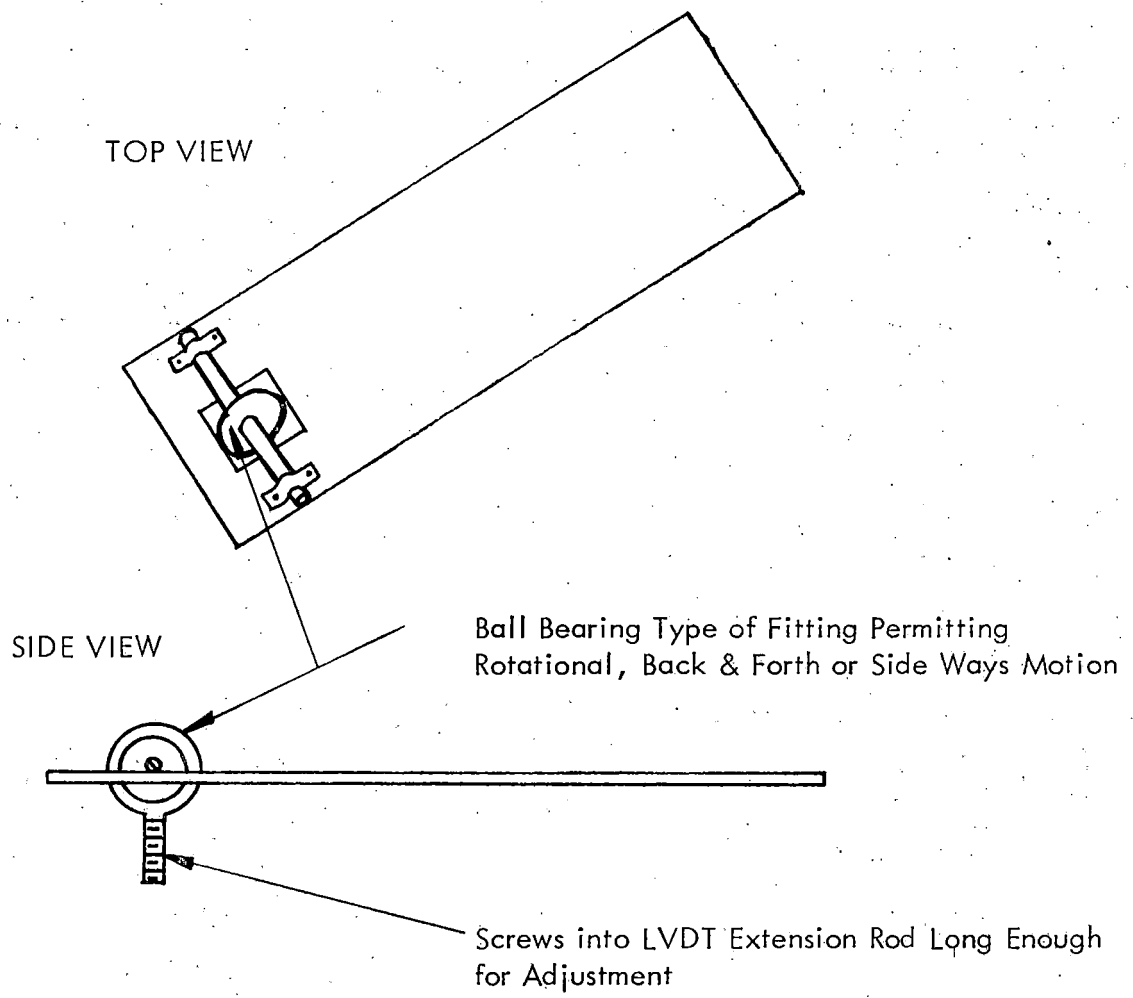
LVDT - BALL JOINT ATTACHMENT
